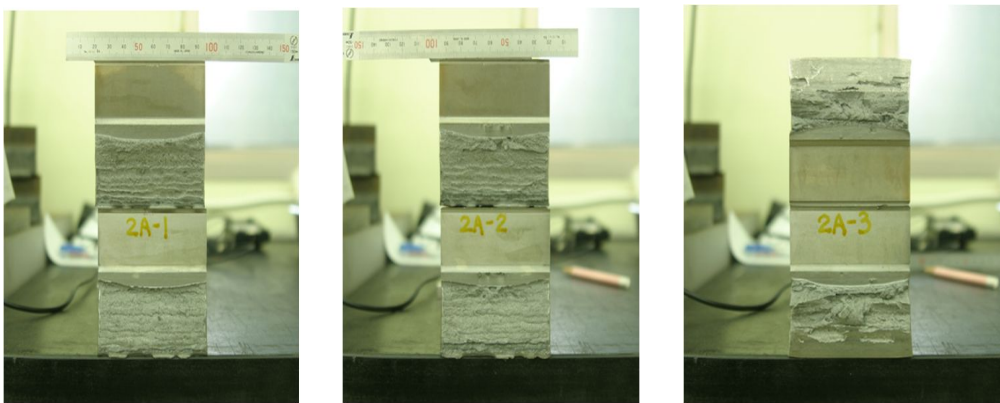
Fractured EGW welded specimen with through thickness notch
